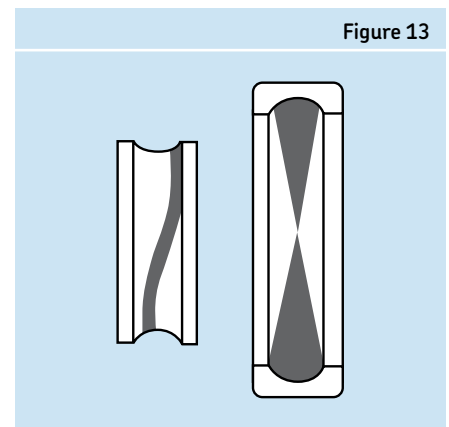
illustrates the load zone produced when the inner ring is misaligned relative to the shaft axis. This condition can occur when the shaft is bent and generates what is referred to as a dynamic misalignment condition.
